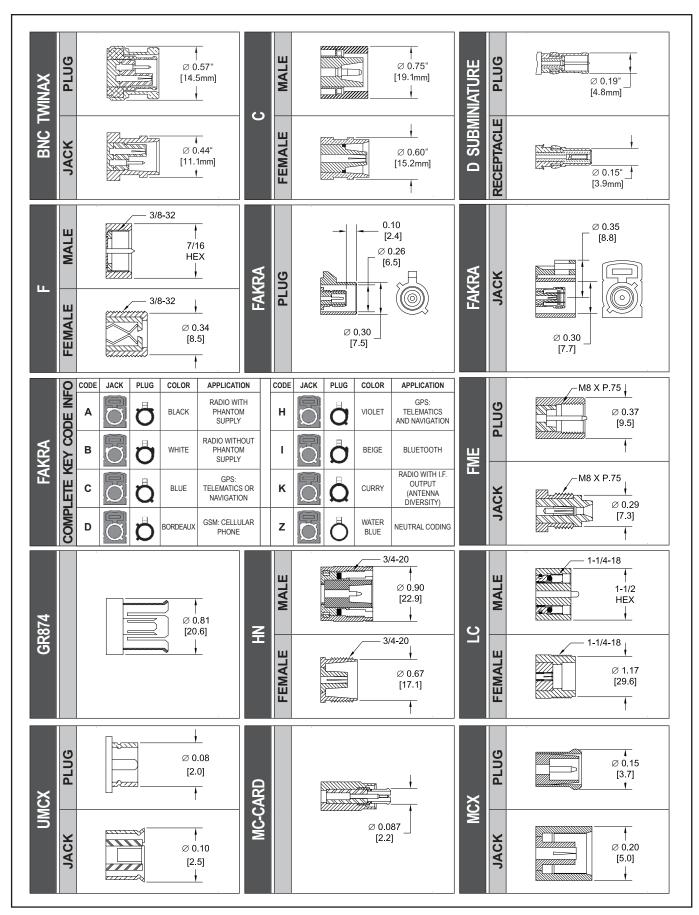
B — Connector side views, set 2 of 4. [Courtesy of Pasternak]
